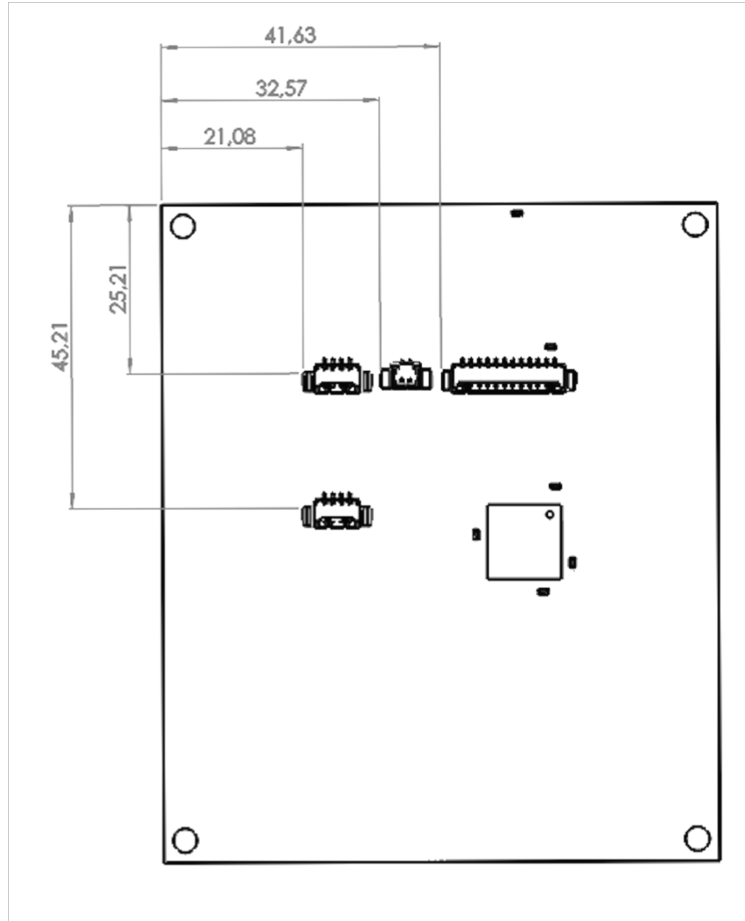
Solar Panel X/Y - Bottom side (connector location)
